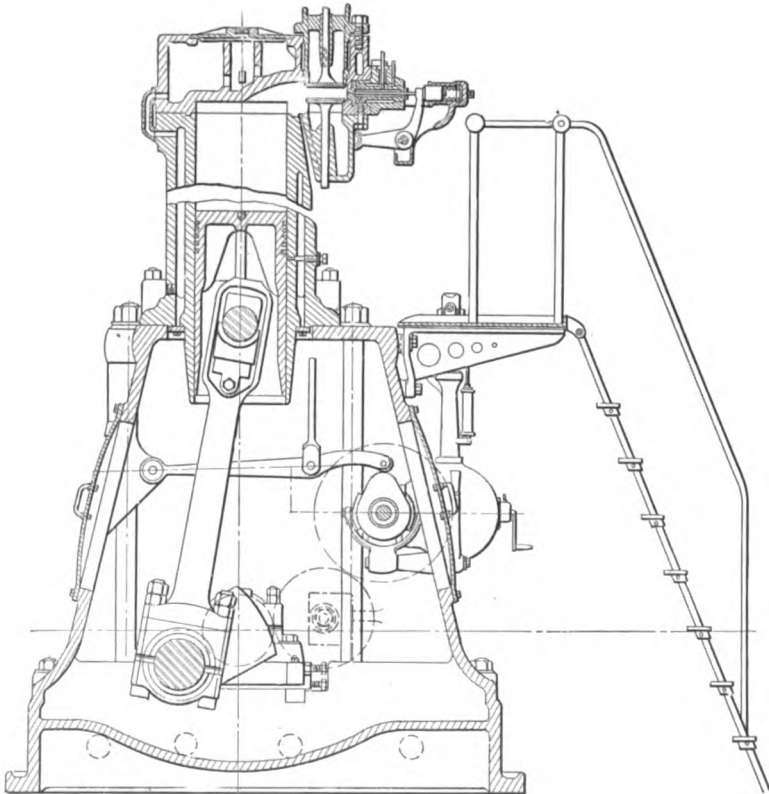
CROSS-SECTION OF AMERICAN DIESEL ENGINE
